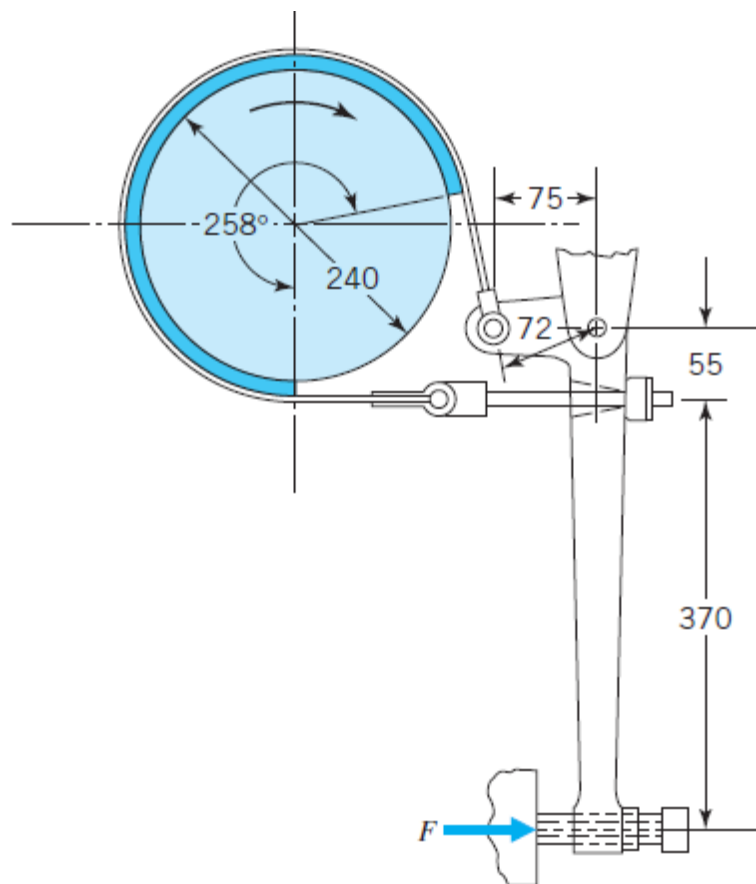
Band brake with a punch press (ref: Fundamentals of Machine Component Design, 5th Edition, Wiley.)
